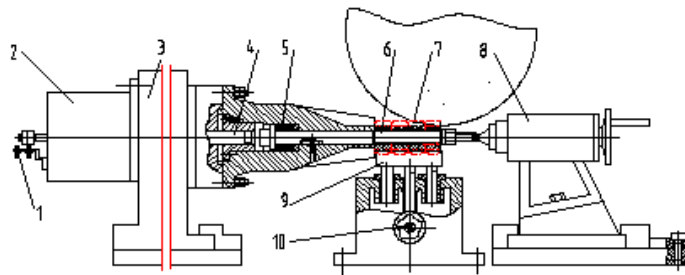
Sketch of spherical roller amendment of CNC grinding wheel
